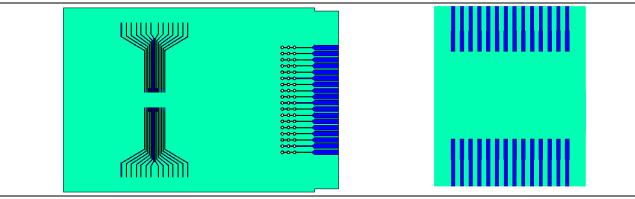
PCB reference layout (according to JEDEC 1s0P) left: Reference layout right: detail of footprint
